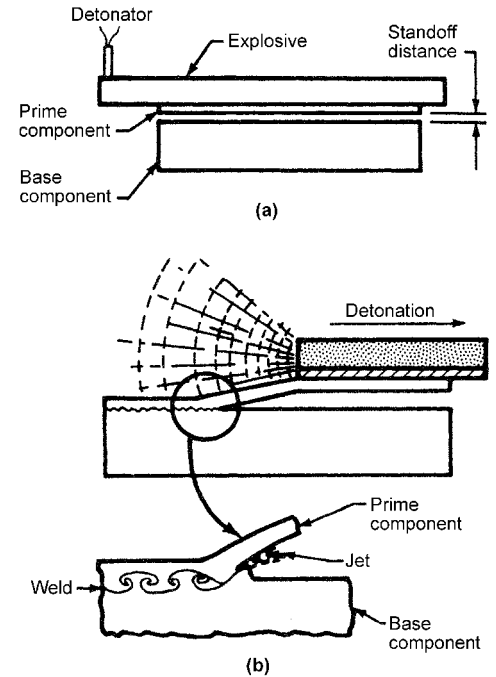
Schematic illustration of the explosion welding process showing (a) the typical component arrangement and (b) the characteristic action between components during welding. Source: Ref 5
